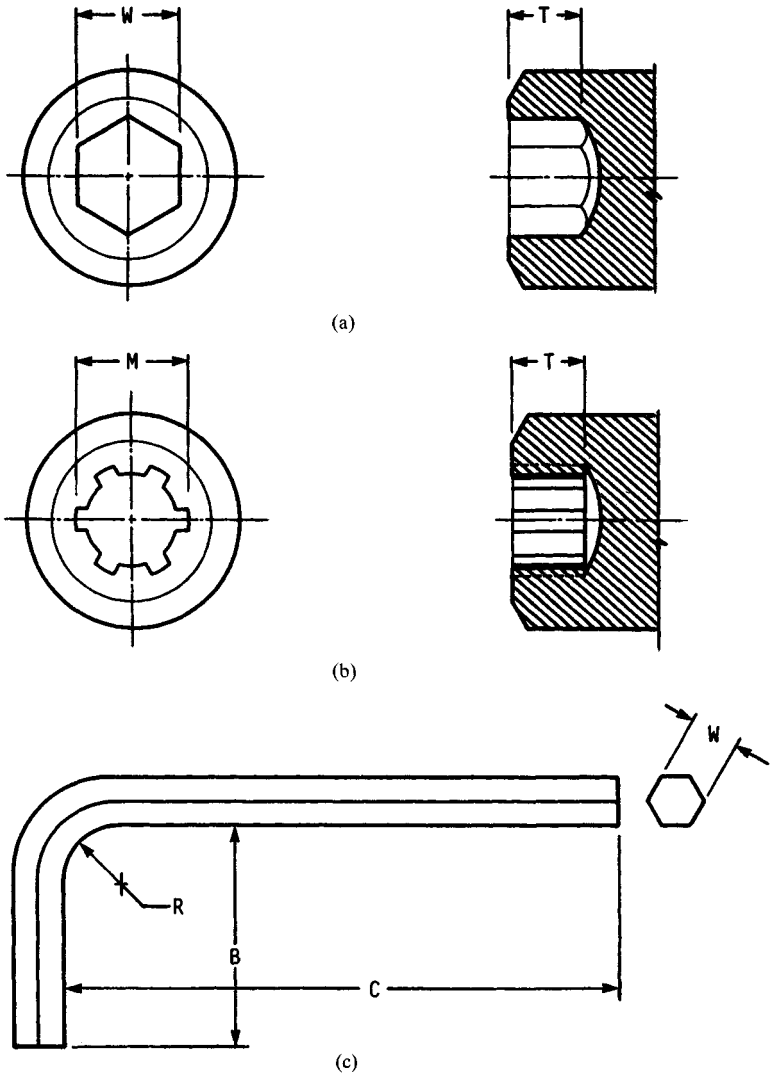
Standard socket shapes. (a) Forged hex socket; (b) forged spline; (c) hex-socket key.
